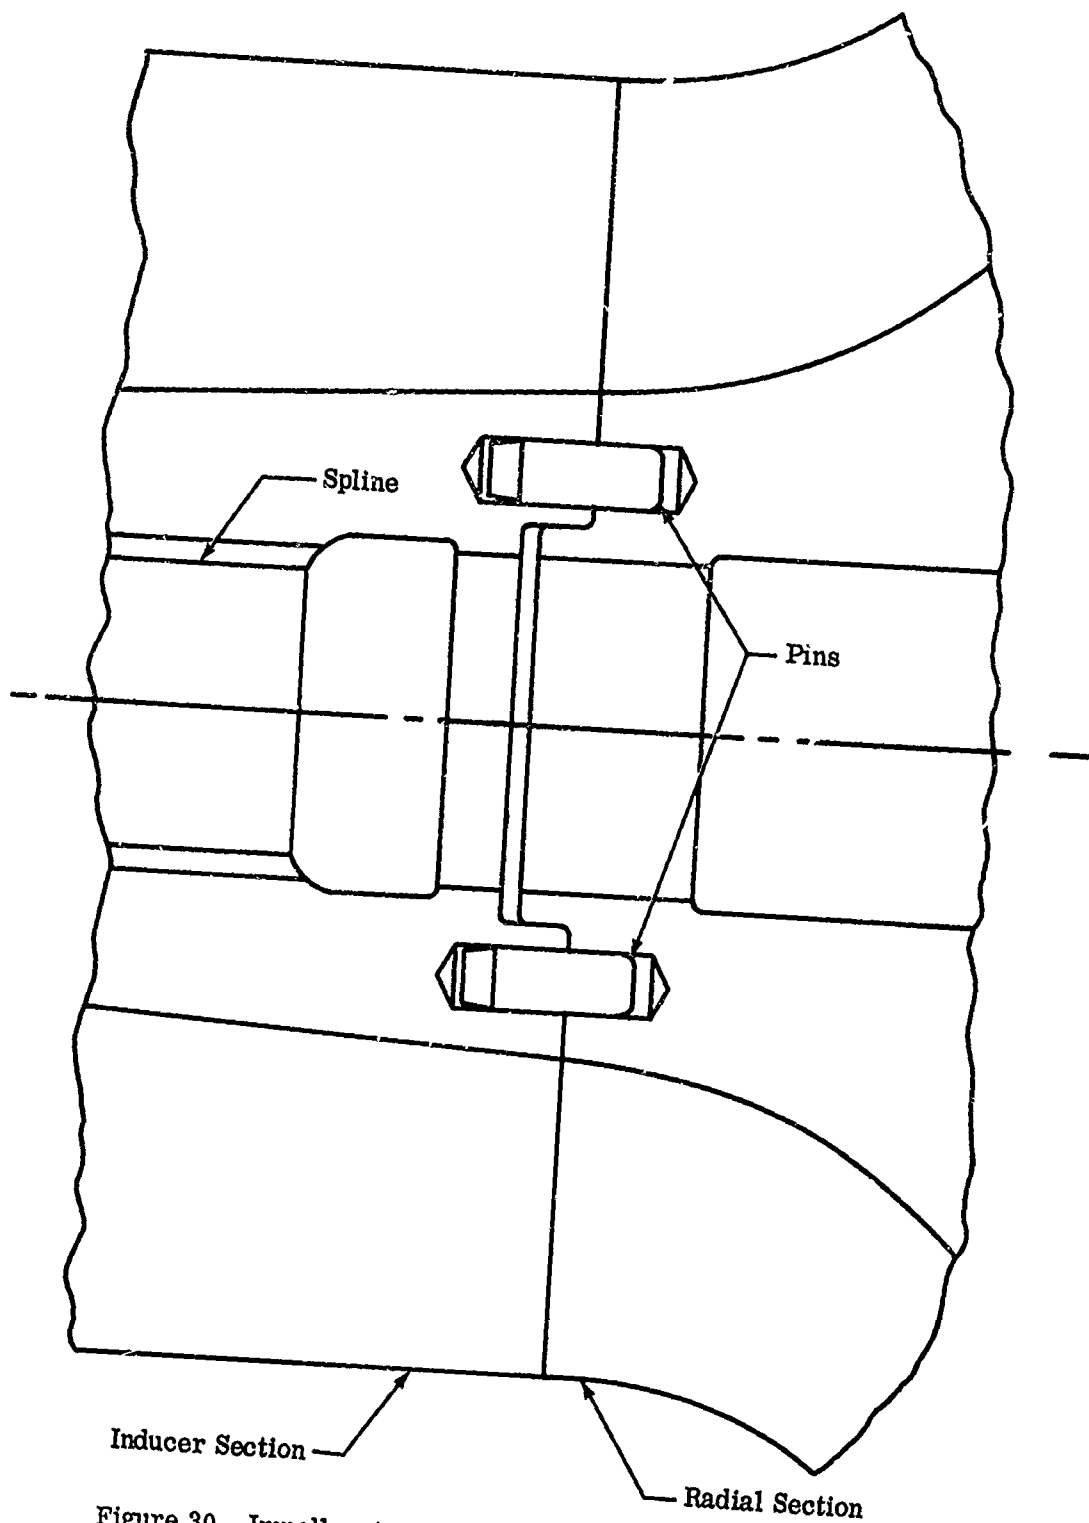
Impeller Assembly Method (Shown Twice Actual Size).
